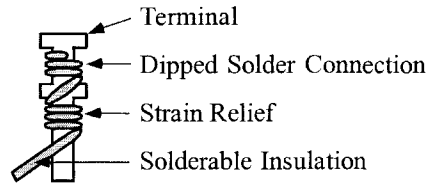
Solderable Insulation on a Dip Solder Terminal.
